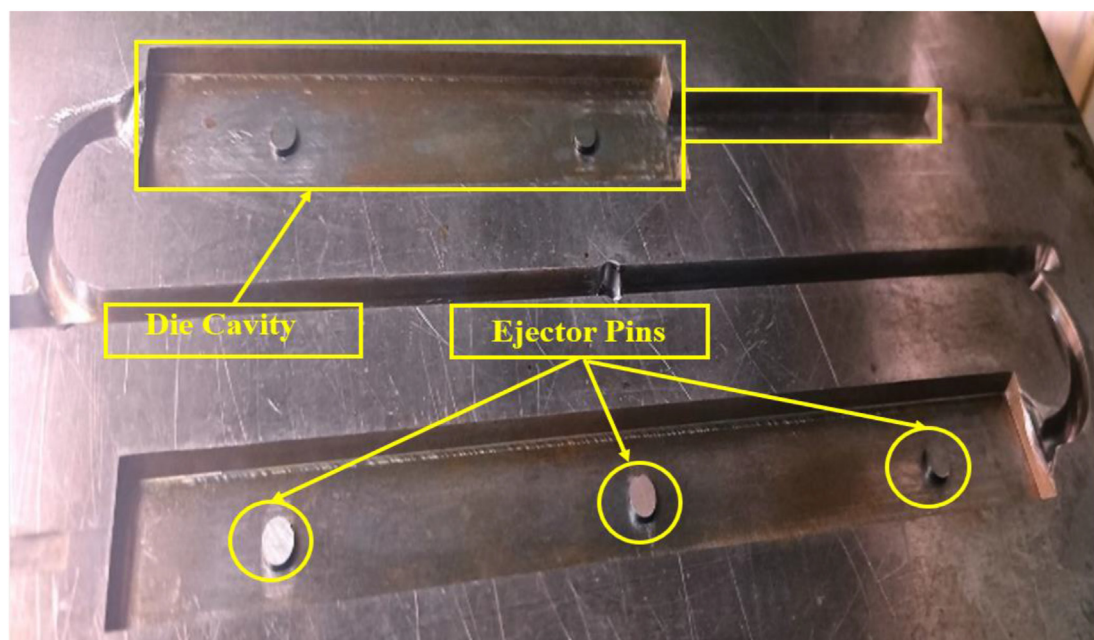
Die assembly of an injection molding machine, featuring a close-up view of the die cavity and ejector pins.
